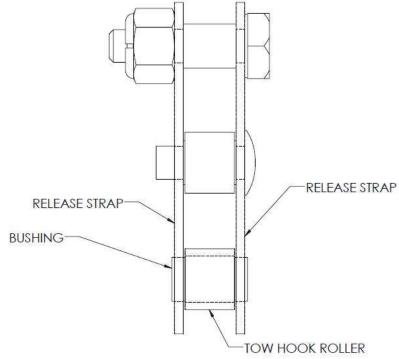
Release Subassembly with Tow Hook Roller and Bushing in place.
